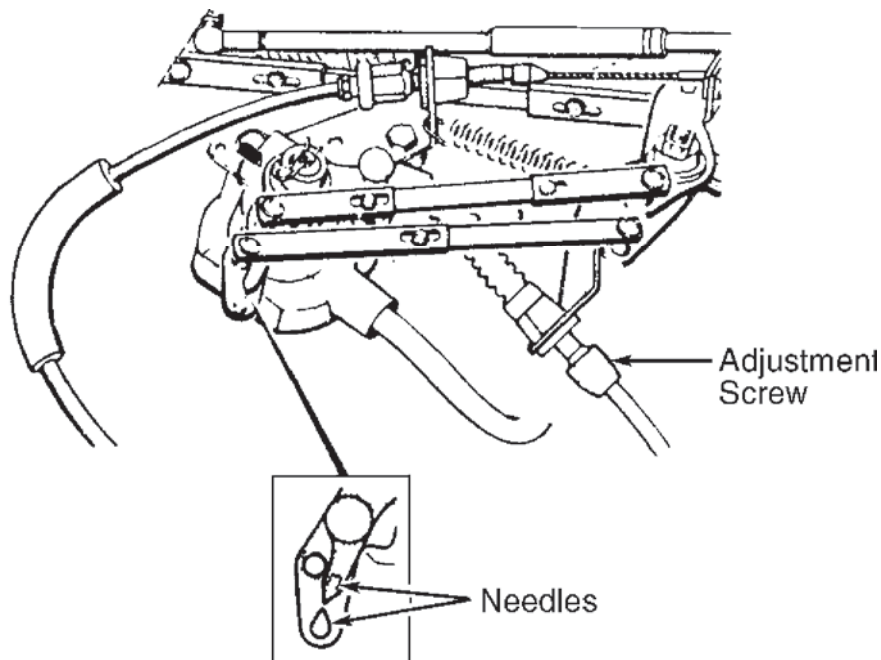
Adjusting Shift Linkage (722.4 Trans. Shown; Others Similar)
